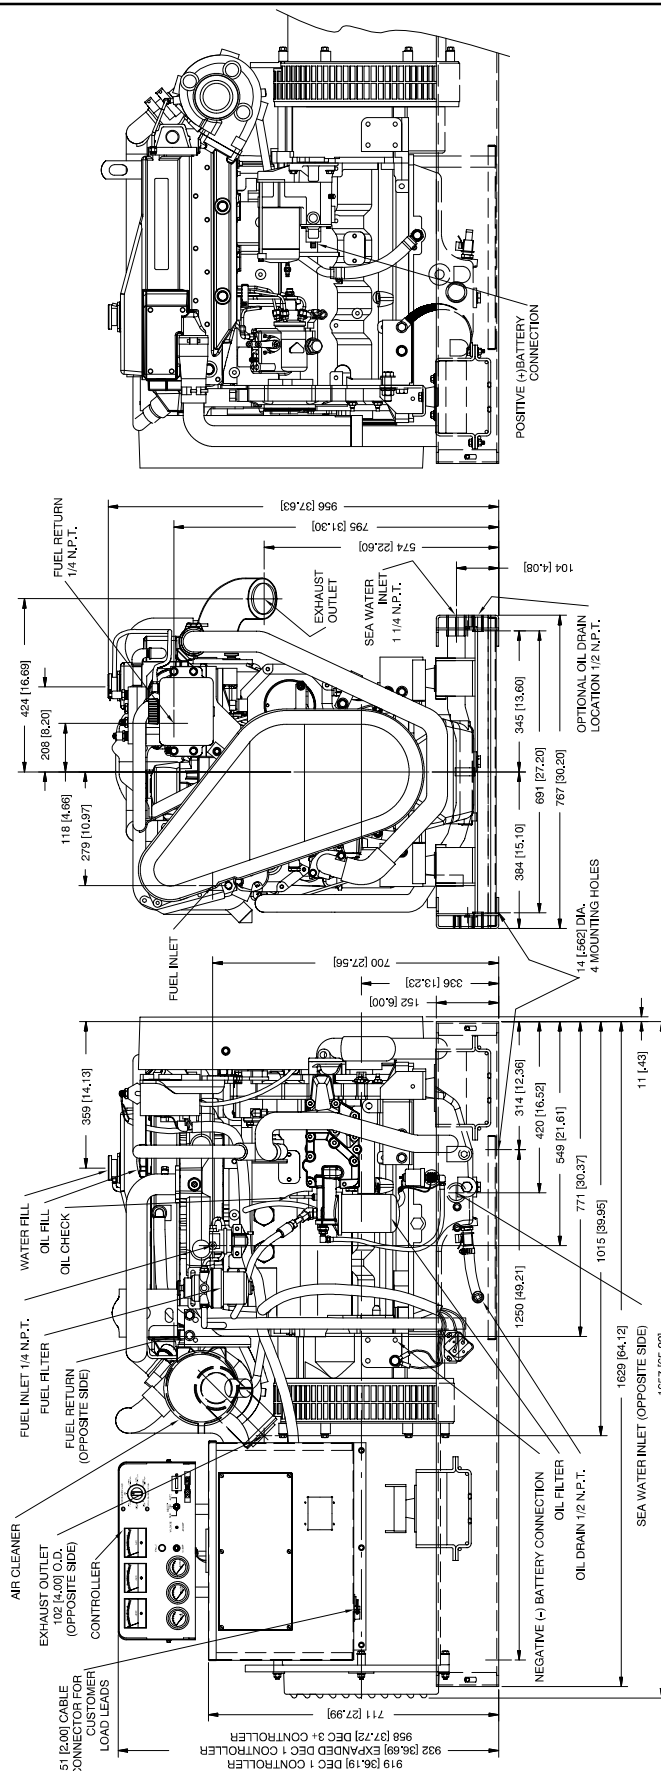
Dimension Drawing, 33EFOZ/40EOZ with Sound Shield
